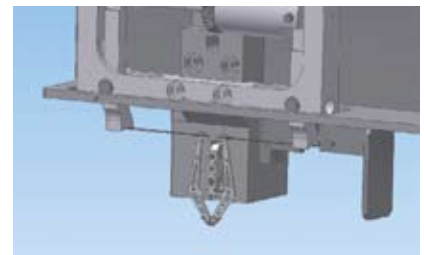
Drawing of 2G cold bump pull jaws and load cell.
